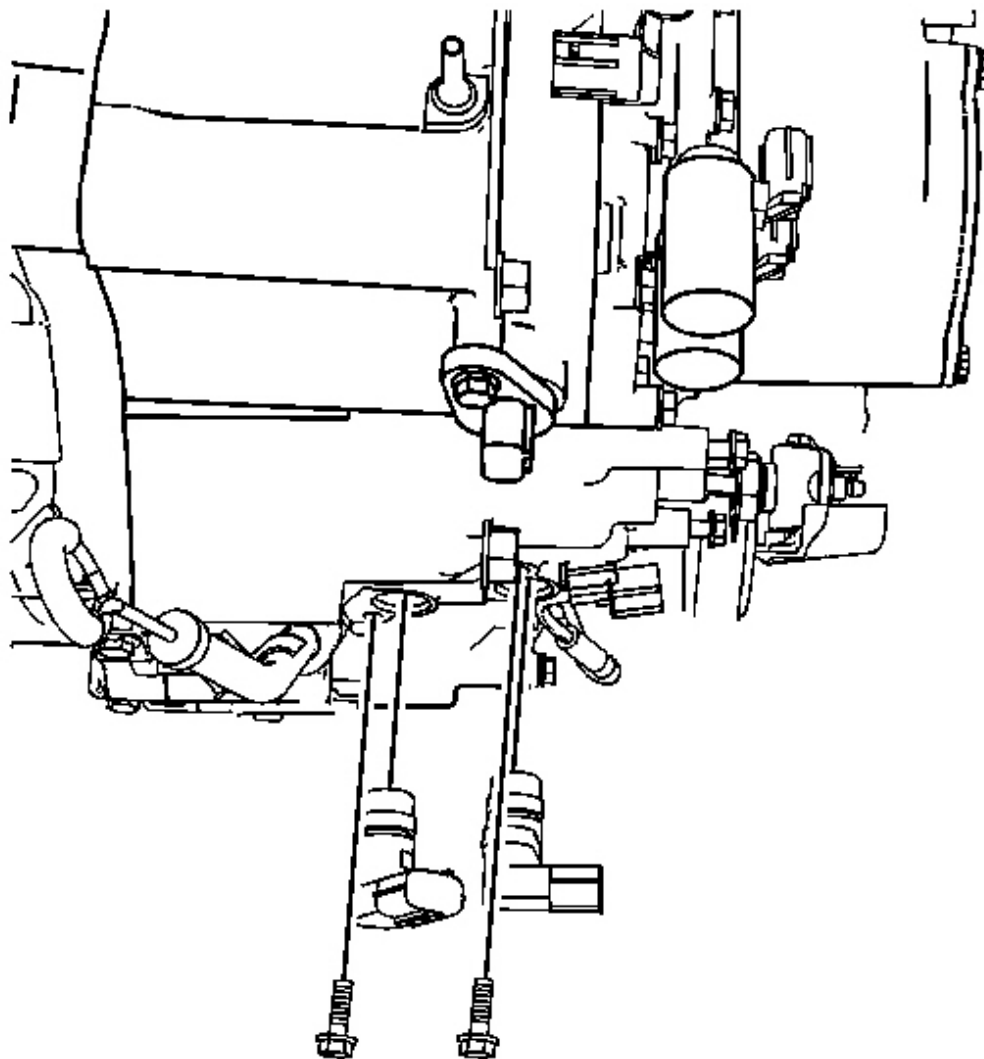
Input/Output Speed Sensor, Bolt & Screw
